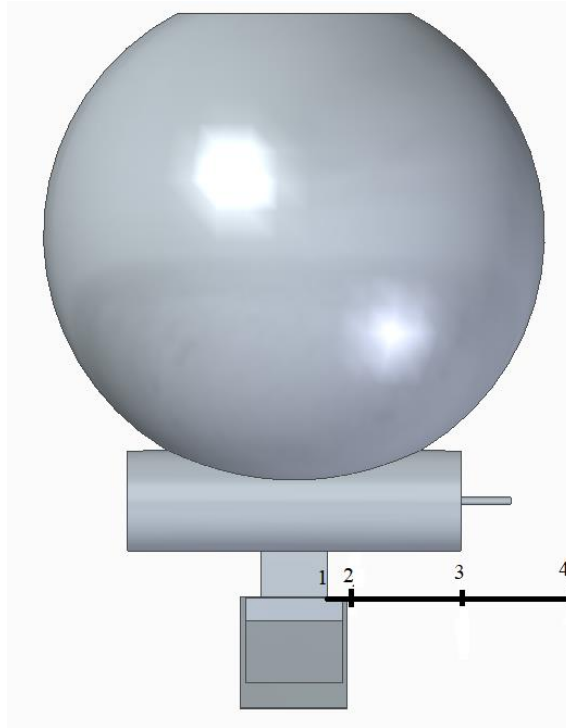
Other side of the assembly of the PCB with the physical dispenser
